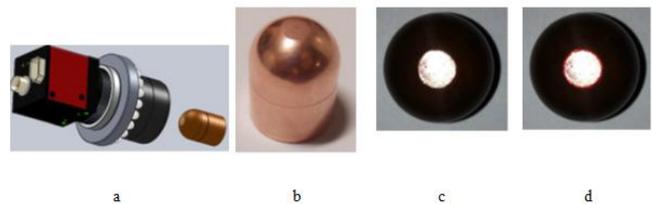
Showing sensing methods of welding tip geometry - version No.2
